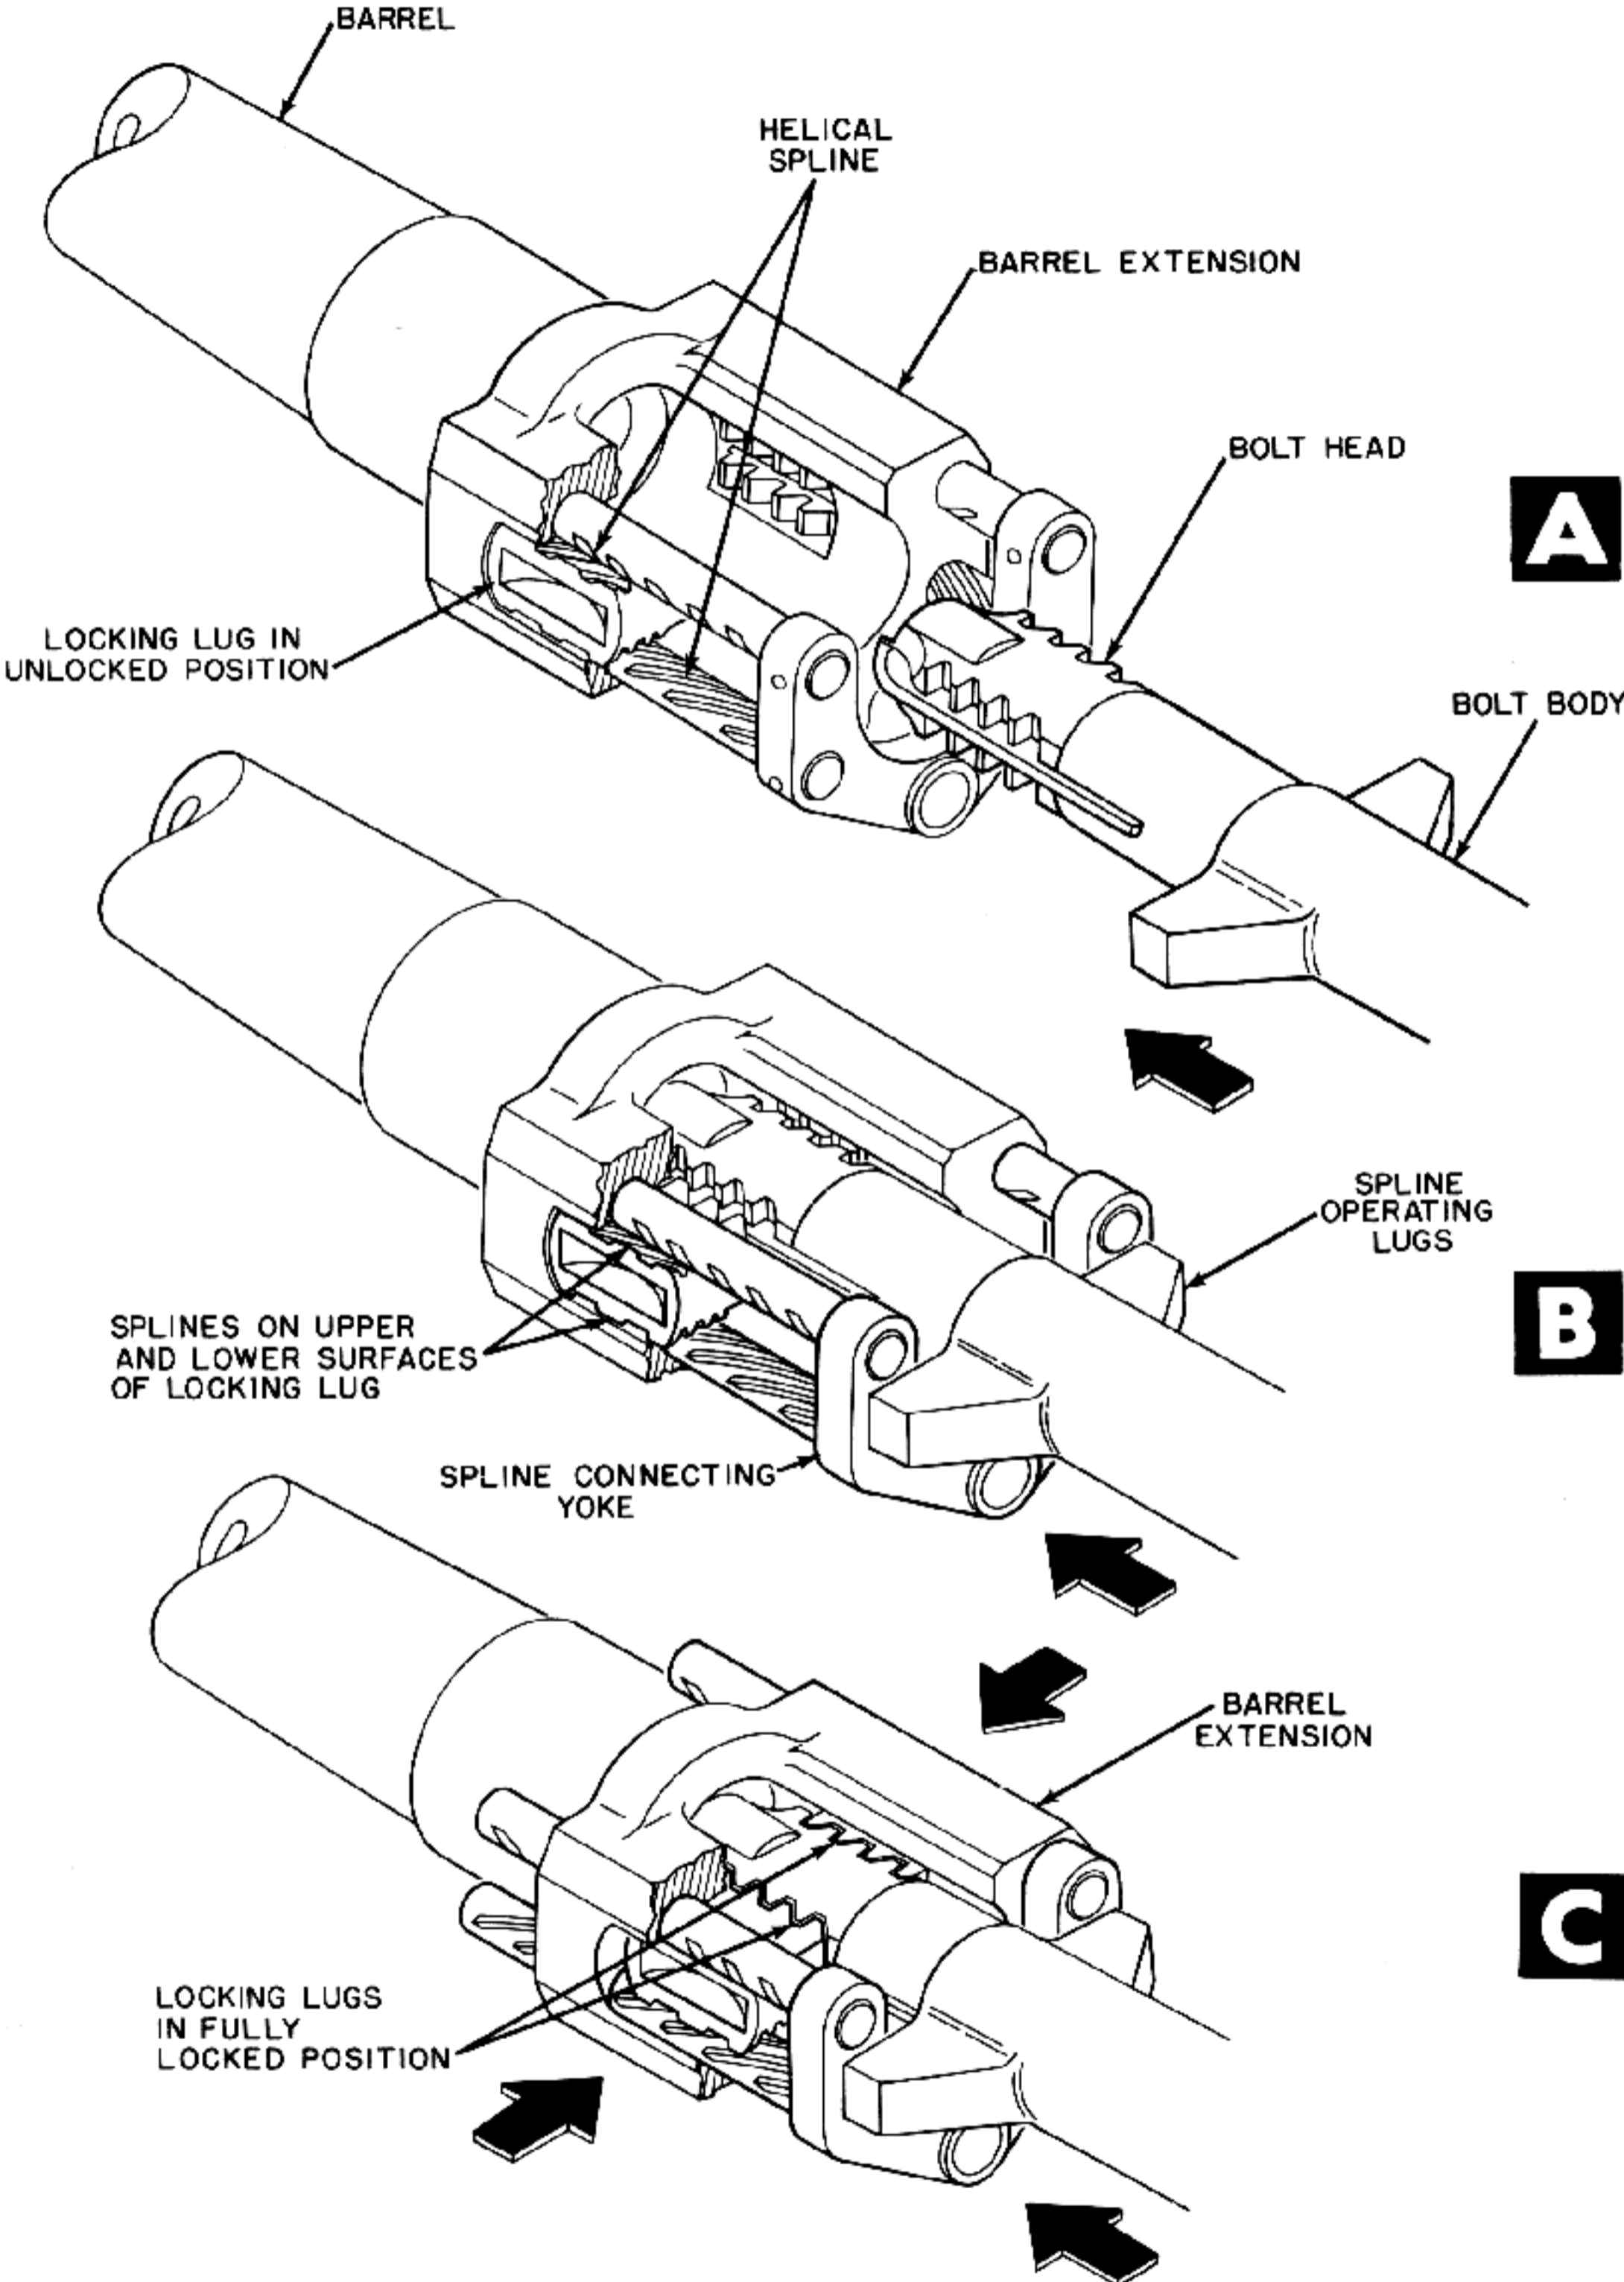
Helical Splines in Barrel Extension Lock Bolt by Pressure of Bolt Extension.
